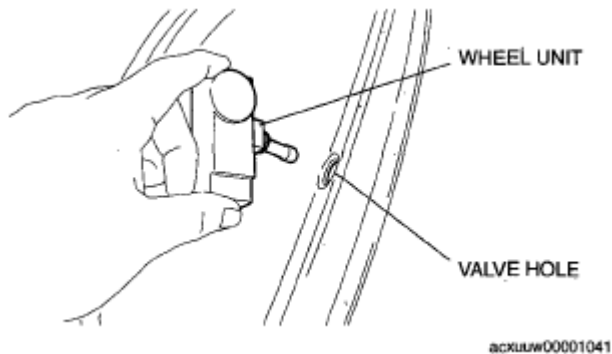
Inserting Wheel Unit Valve Into Valve Hole
